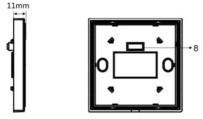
Dimensions - Side View Figure 5. Components - Back View
